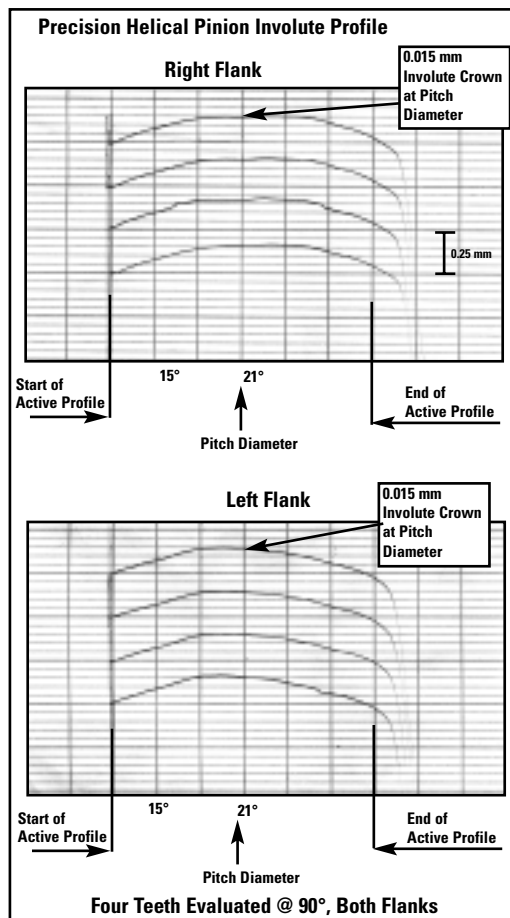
Involute gear traces on rolled densified helical gears taken at 90° intervals on the gears.
